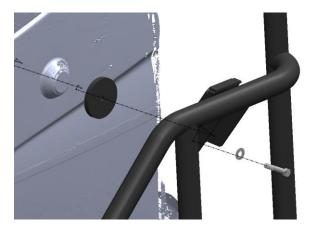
Center Mount Hardware Assembly (Outside of Door)
